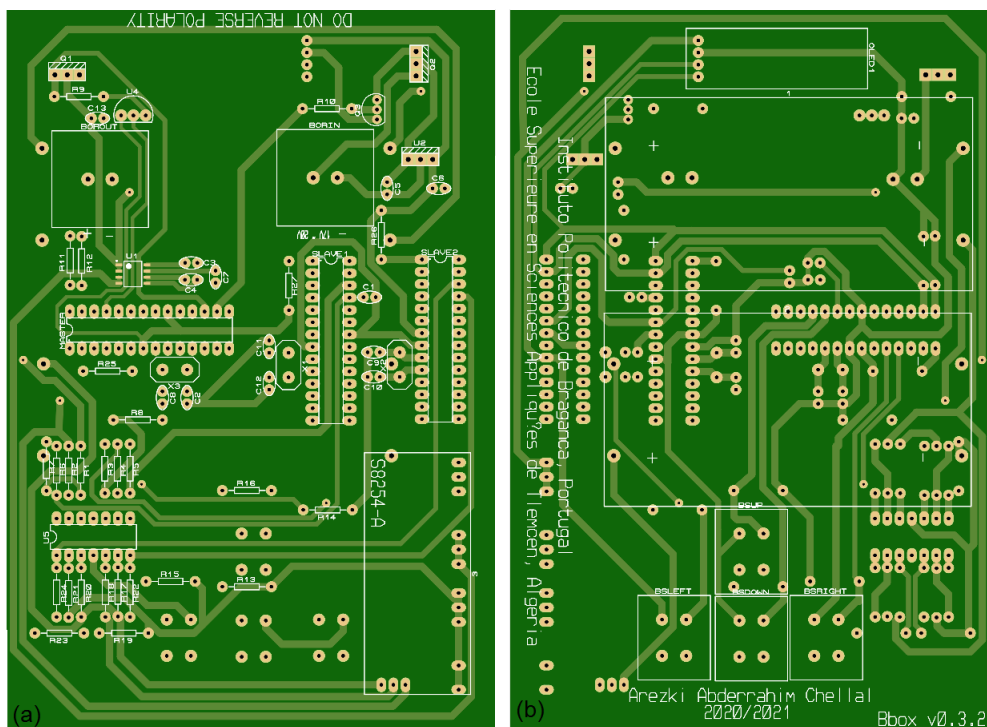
Printed Circuit Board. (a) components view. (b) top view
